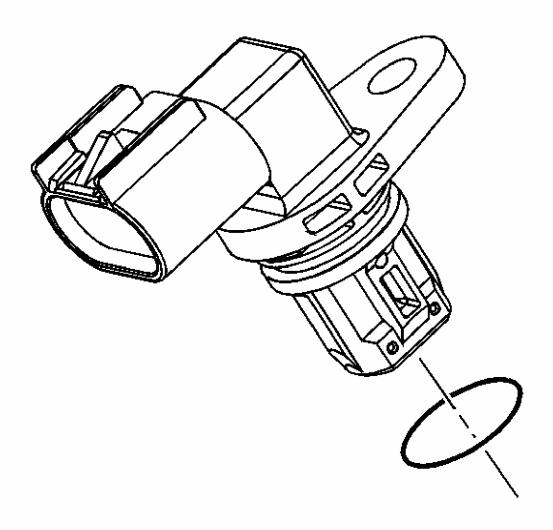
Identifying CMP Sensor O-Ring Courtesy of GENERAL MOTORS CORP.
